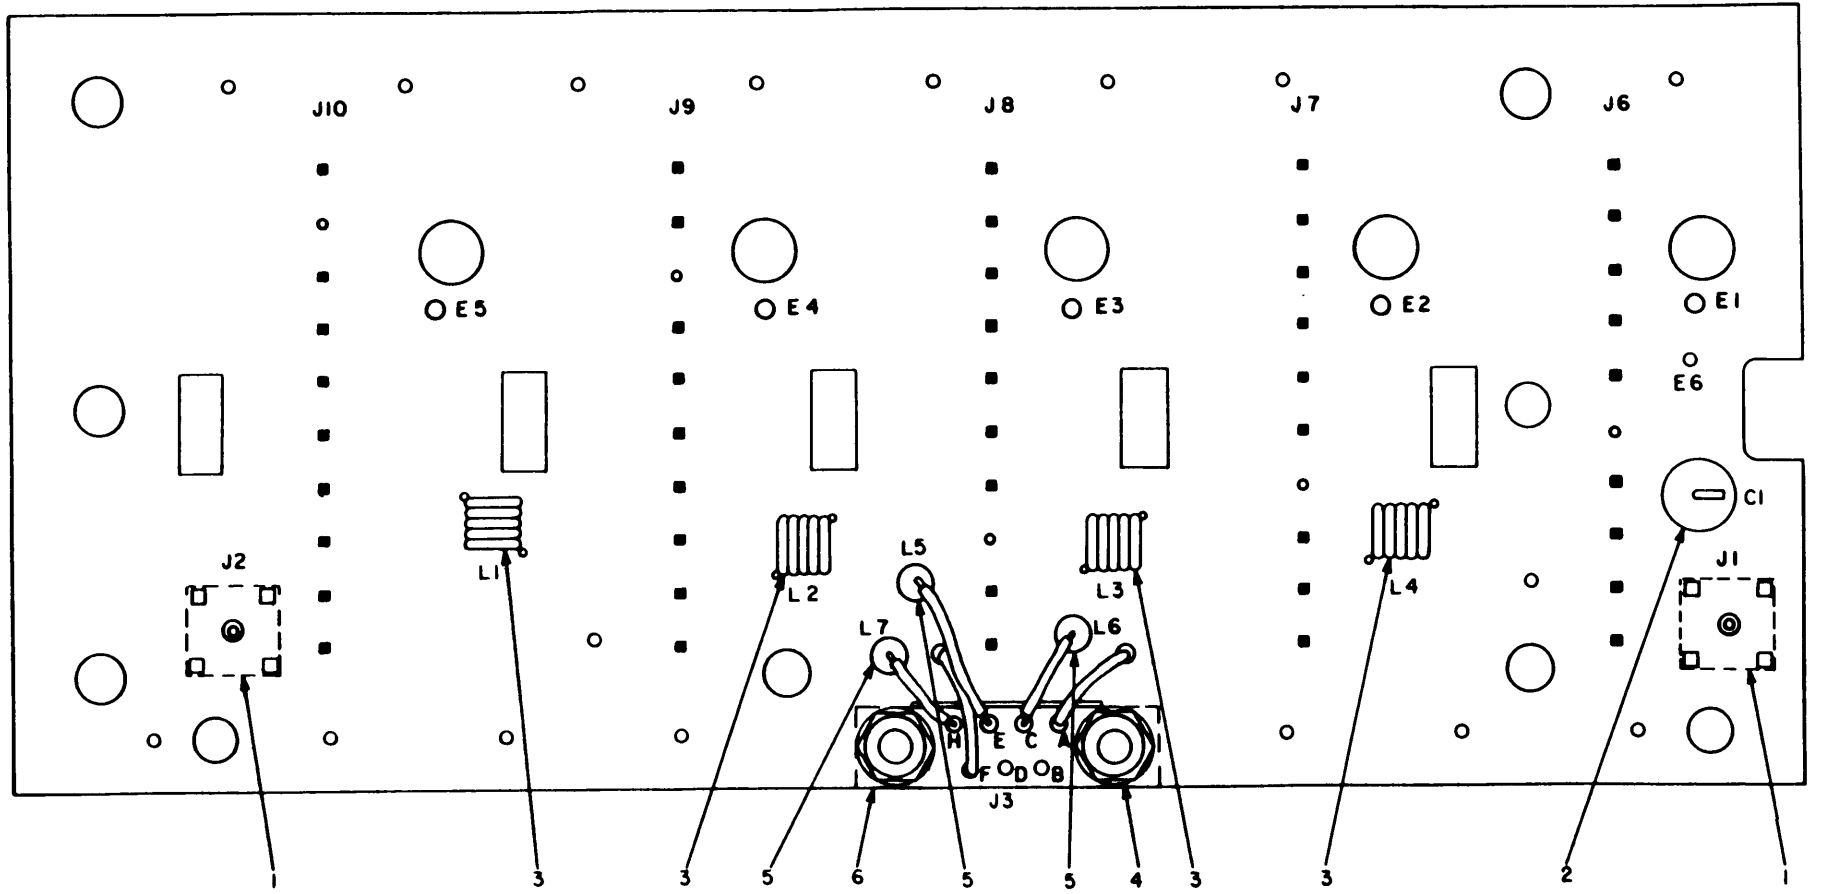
GEAR AND TUNER ASSEMBLY, 1A1A1A2.
